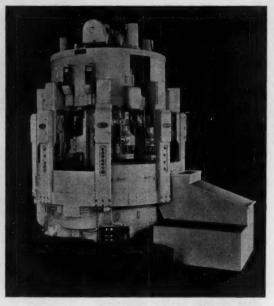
Mult-Au-Matic vertical-spindle chucking machine
